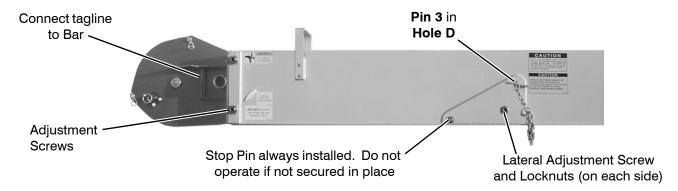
Typical Jib Point and Telescopic Jib Stinger Pin
